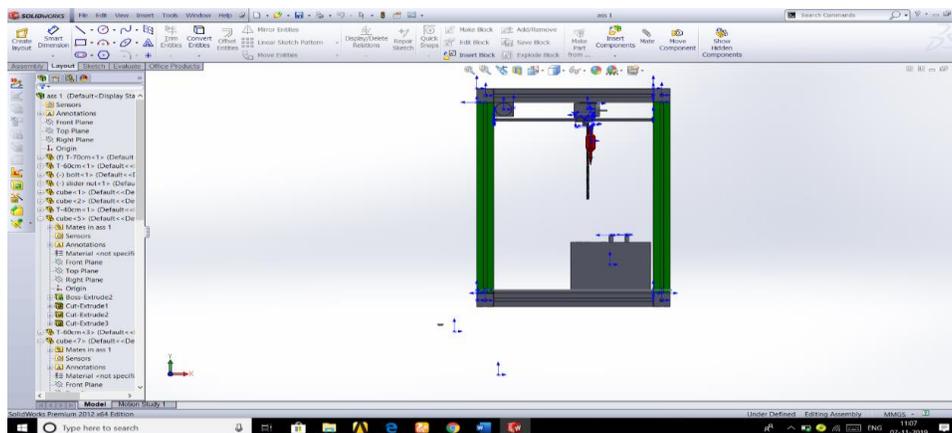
This is the side view of the machine in which we can clearly see the pipette and the motor mounts
